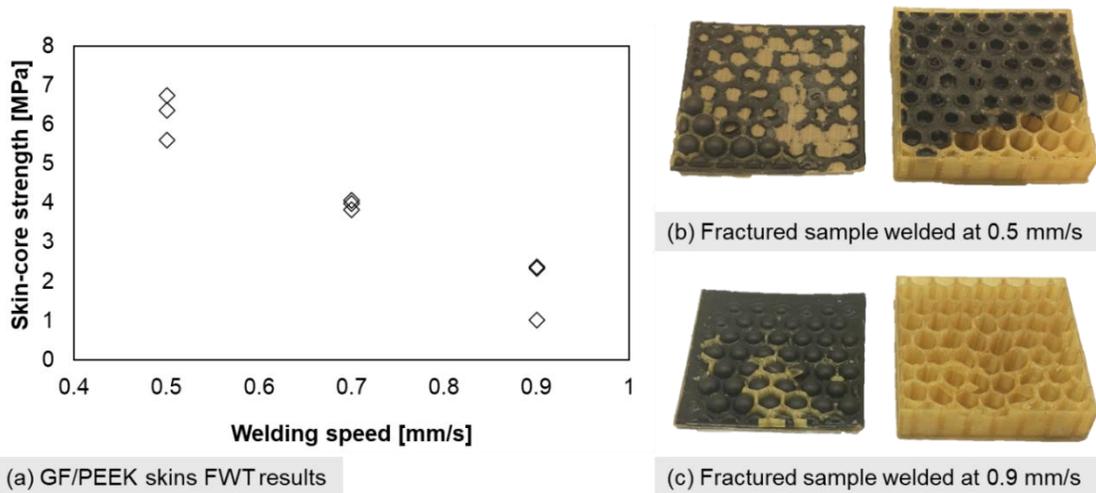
(a) GF/PEEK FWT test results. Fractured samples welded at (b) 0.5 mm/s and (c) 0.9 mm/s are presented.
